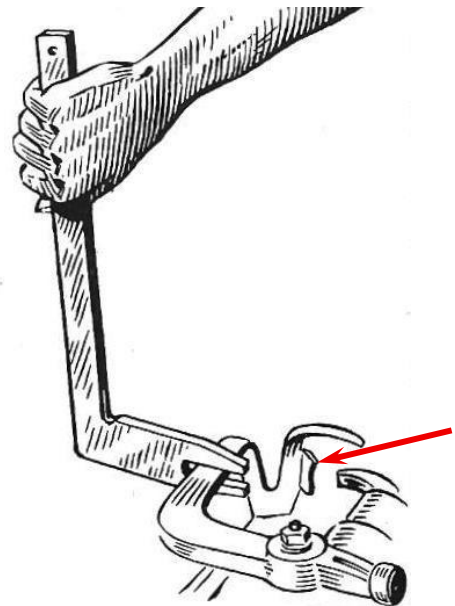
Adjusting a Deering-type Knife Arm – Integral Stripper Arm (*arrowed*)
